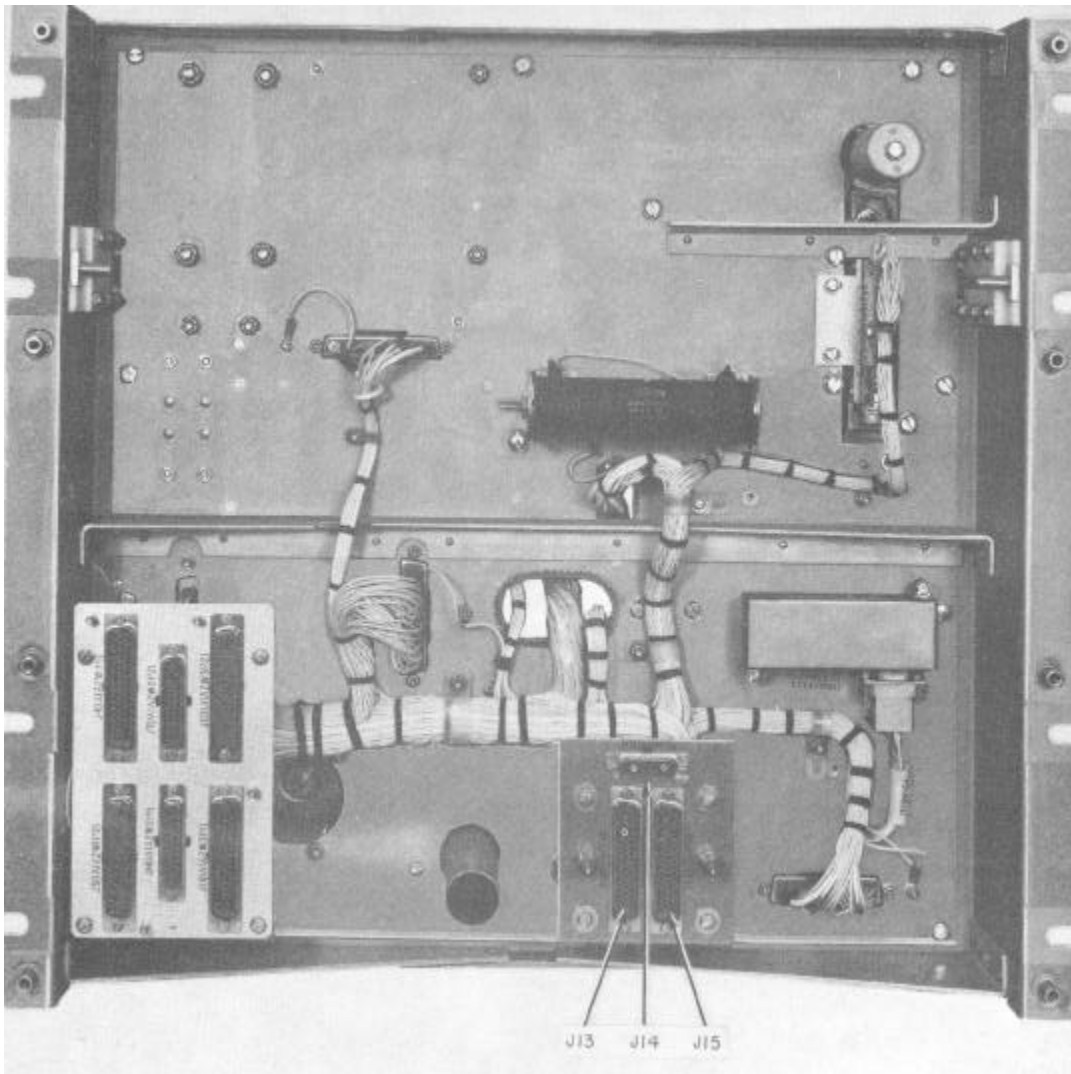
Electrical Test Panel SB-3368/GRM-95(V) Rear Chassis, Front View.
